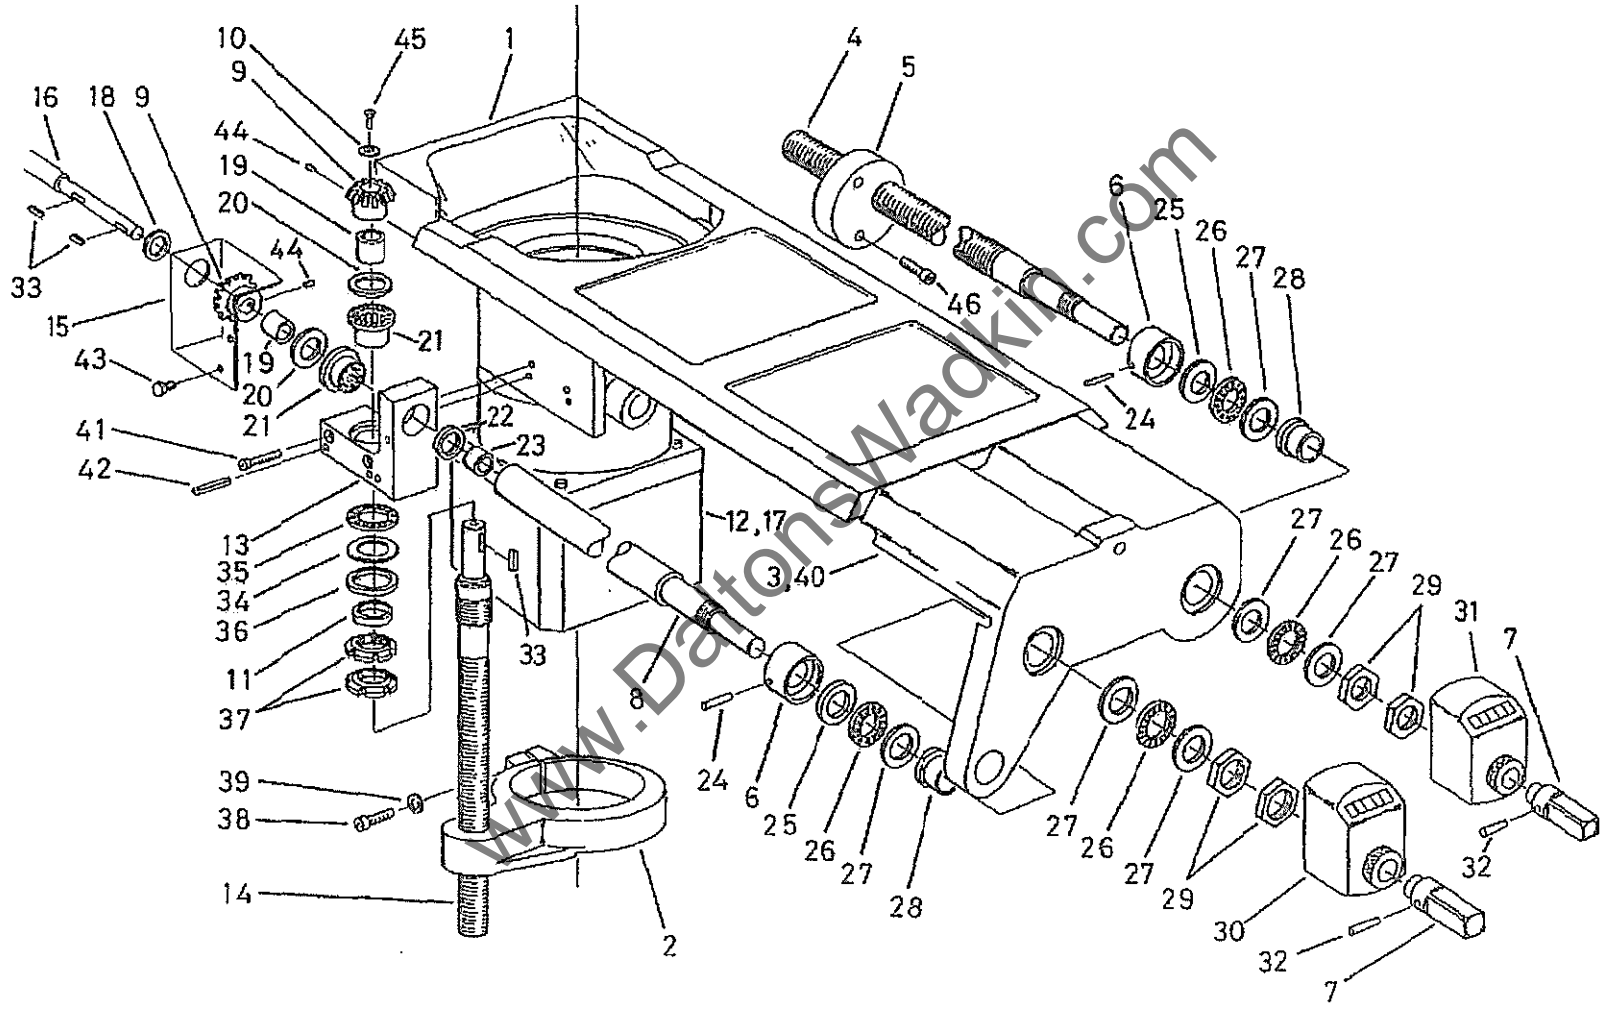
FENCE SIDE HEAD CARRIAGE ADJUSTMENTS
